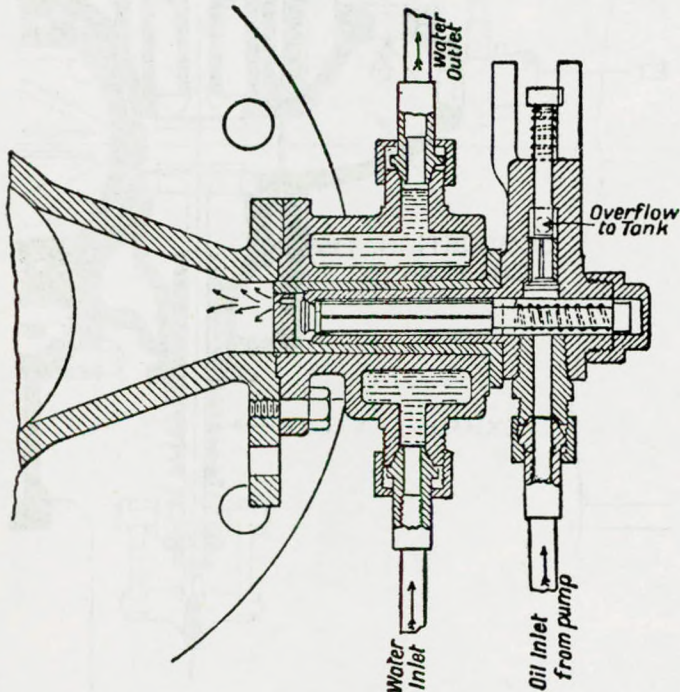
Hornsby-Akroyd vaporizer valve box, water cooled type.
